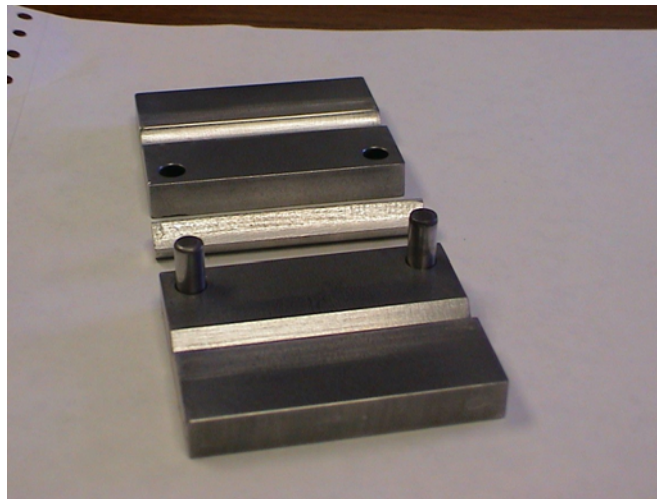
INNER VIEW OF THE GRIP ASSEMBLY (T2)
